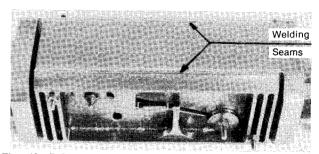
Balance after welding process (fixture bolts not yet removed).
